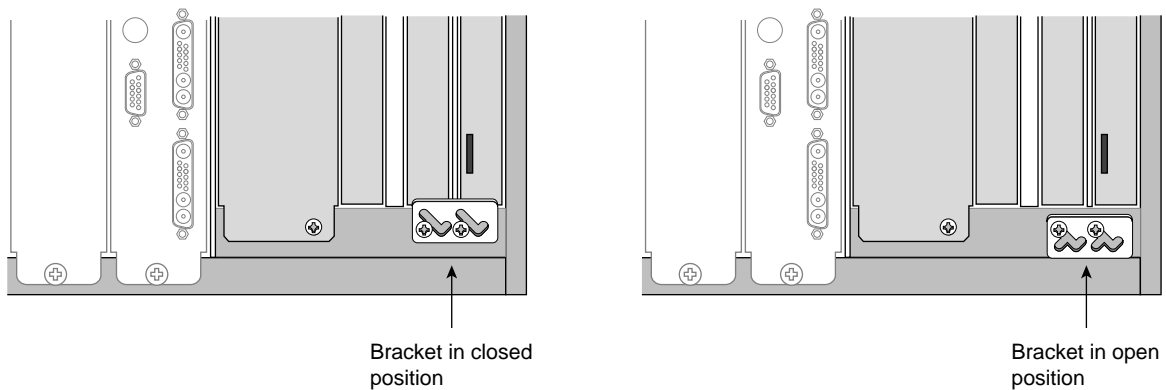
Repositioning the Holding Bracket: Onyx2 Chassis
